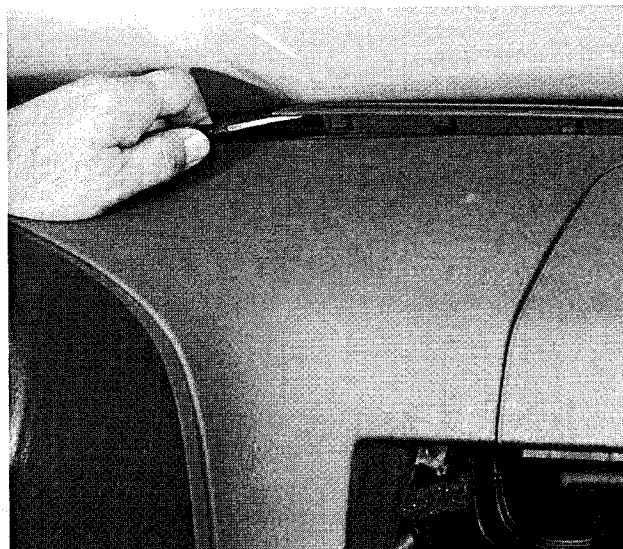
Windshield defroster outlet being lifted off (arrow).
